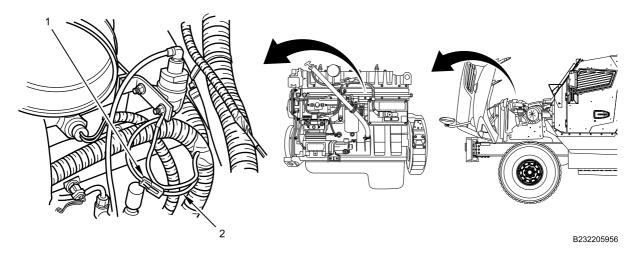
Exhaust Brake Solenoid and Electrical Connector.
